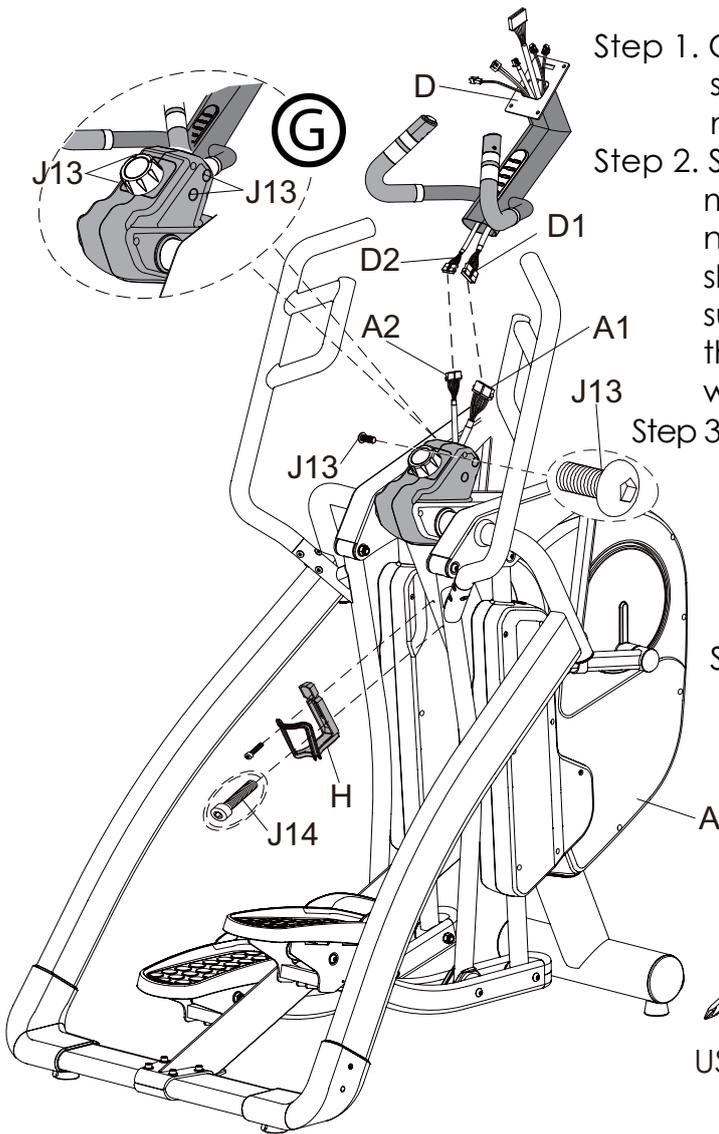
CONSOLE SUPPORTING TUBE AND BOTTLE HOLDER ASSEMBLY
